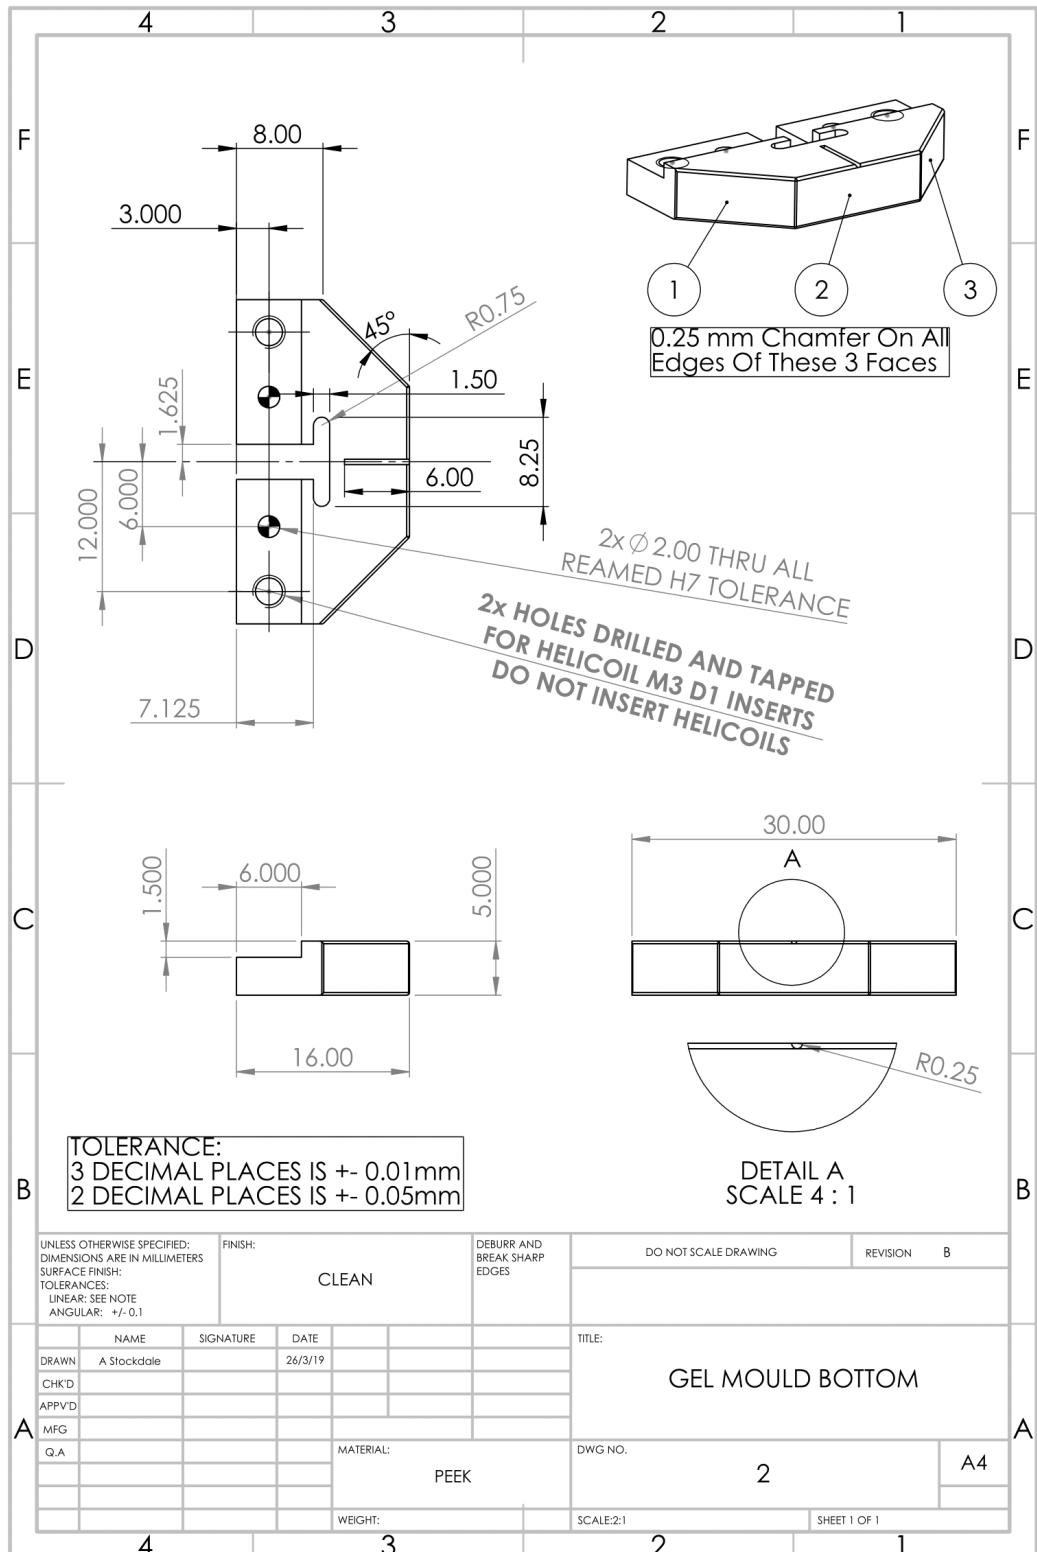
CAD drawing of the bottom piece of the distraction mould.
